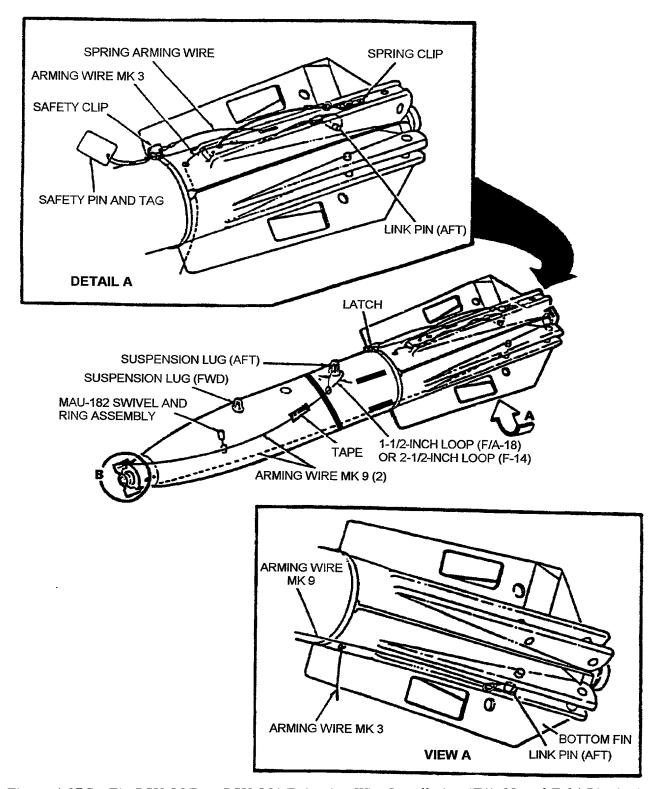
C. Fin BSU-86/B or BSU-86A/B Arming Wire Installation (F/A-18 and F-14 Rigging) (Sheet 1)
